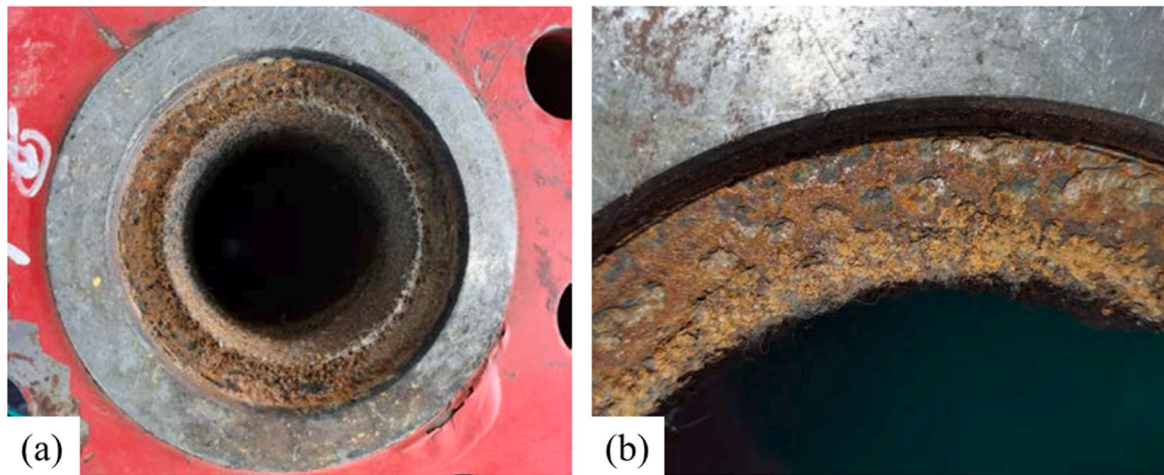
Macroscopic image of the corroded ASTM A105 flange; (a) corroded sealing groove; (b) magnified corroded sealing groove⁵ (Ji et al., 2023).
